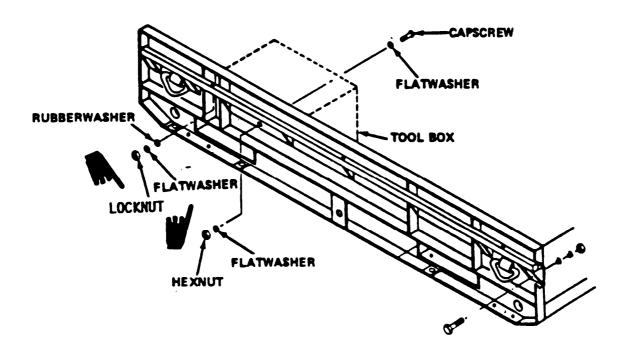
Mounting Hardware and Hole Location for Side Panel Assembly
